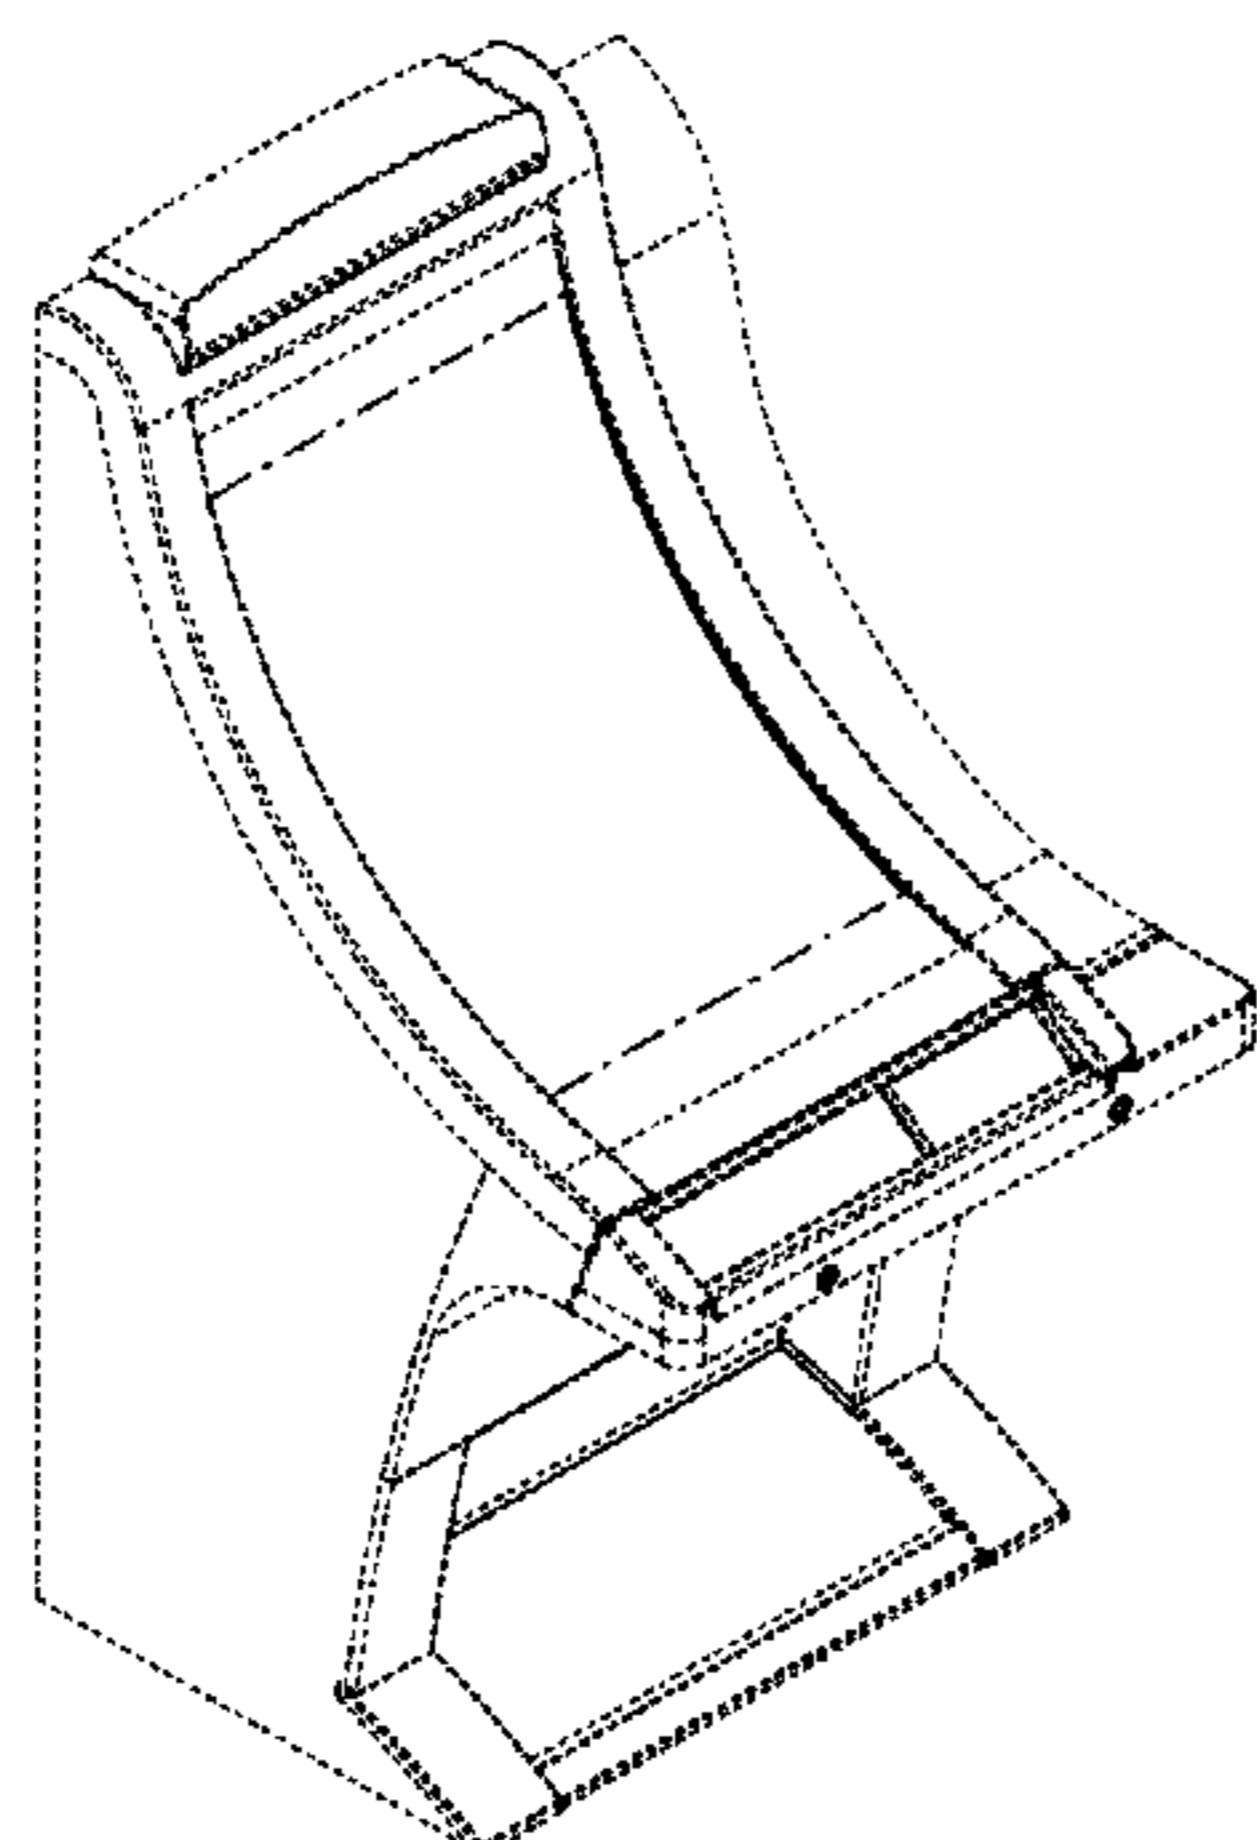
is a right isometric view of the gaming machine shown in FIG. 1.
